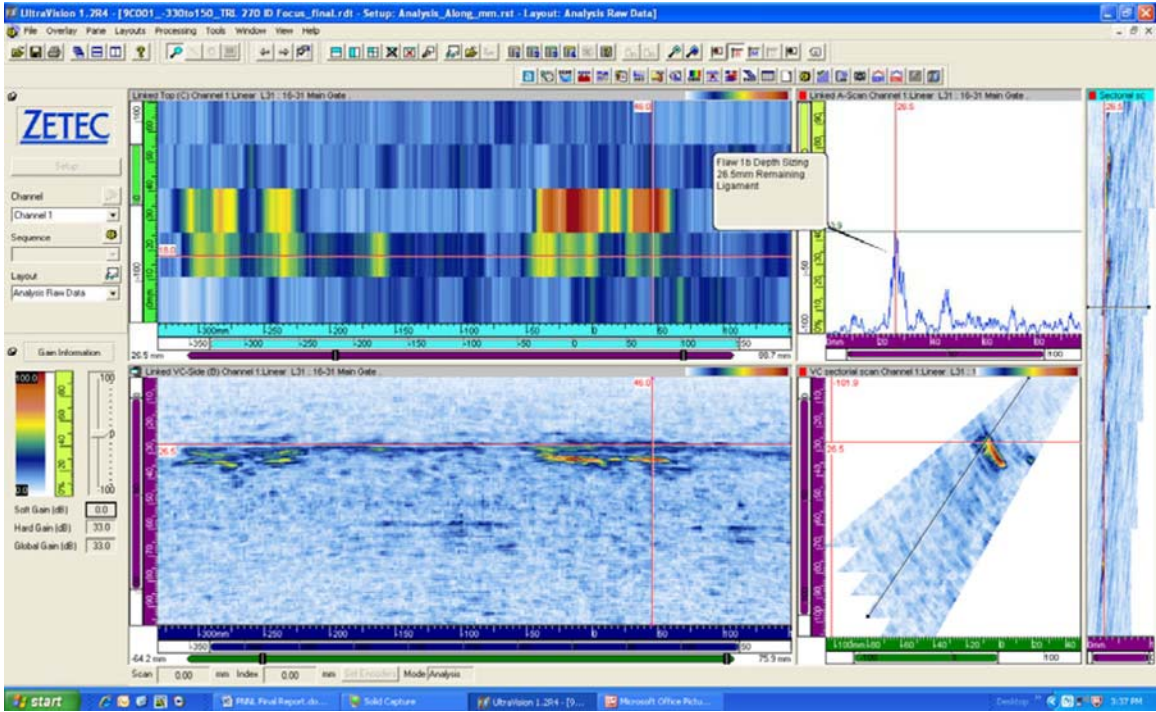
9C-001 Implanted Flaw 1 from the CCSS Pipe Side for Depth Sizing
